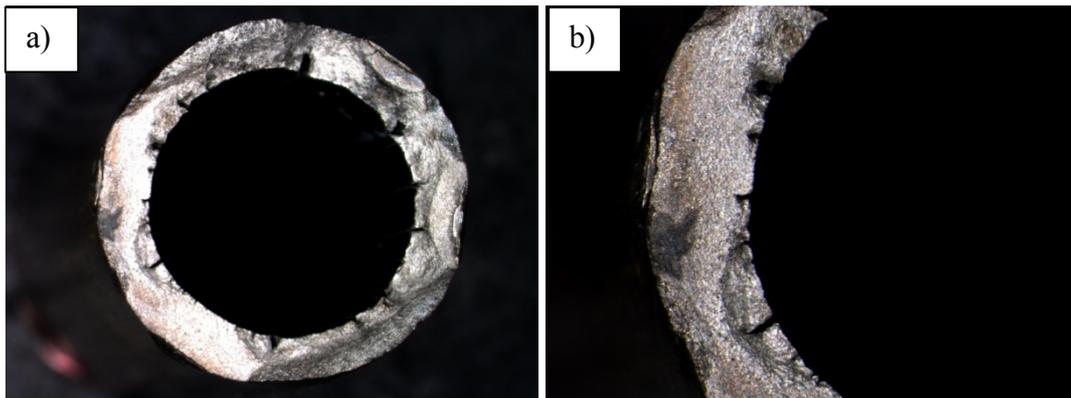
Fracture morphology of welding Titanium alloy tube by tension
